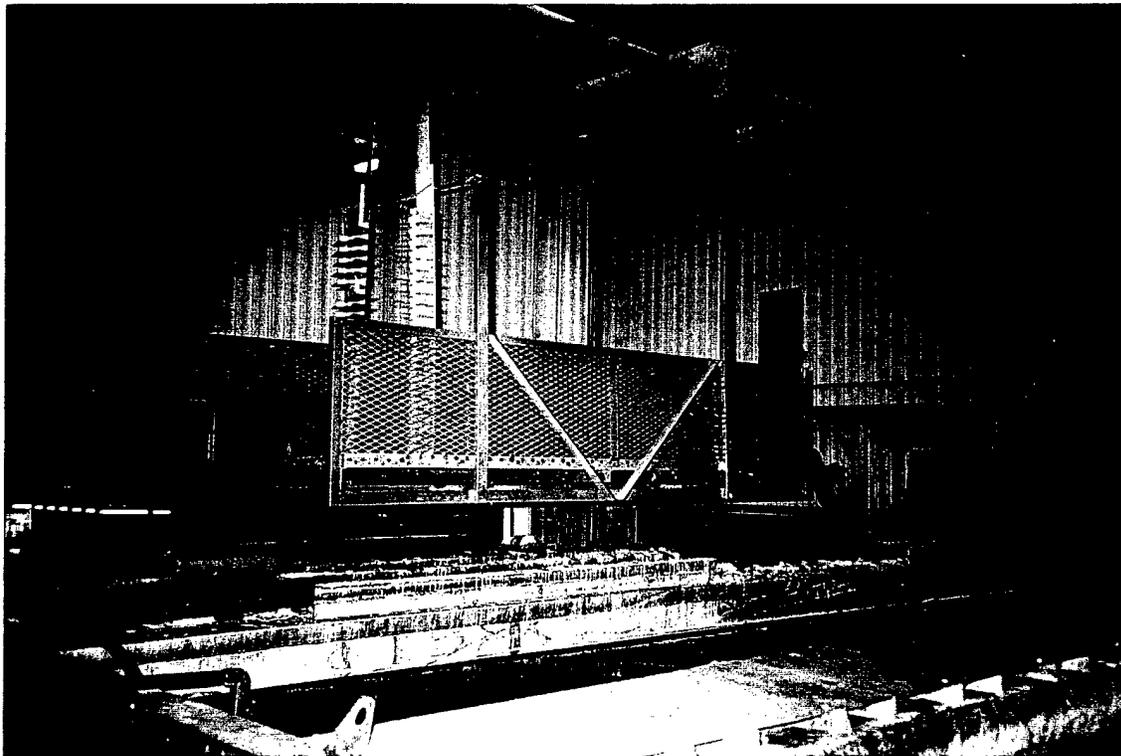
Rack containing the panels to be anodized was simply moved from tank to tank.
